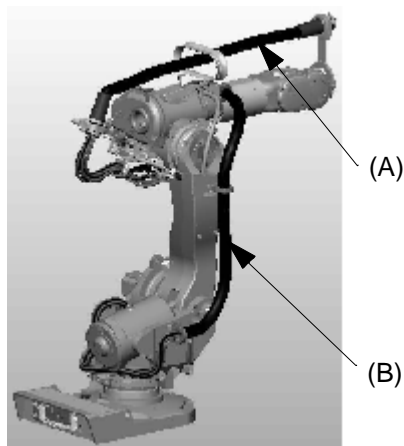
Spot Welding from base to axis 3 , and Spot Welding from axis 3 to axis 6.
